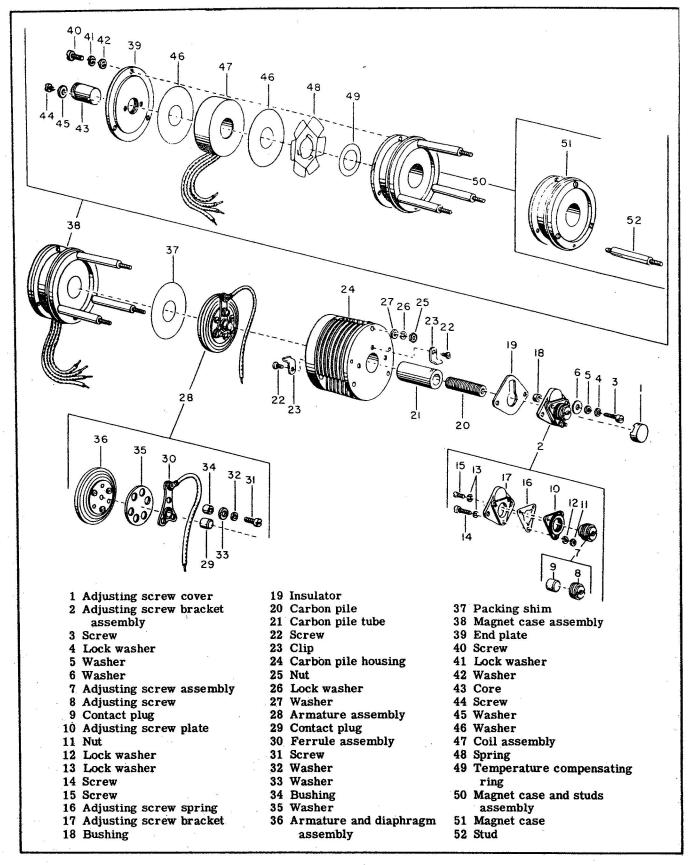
Exploded View - Carbon Pile Regulator Assembly - D-C Carbon Pile Voltage Regulator - Eclipse-Pioneer Type 1042-17-A
